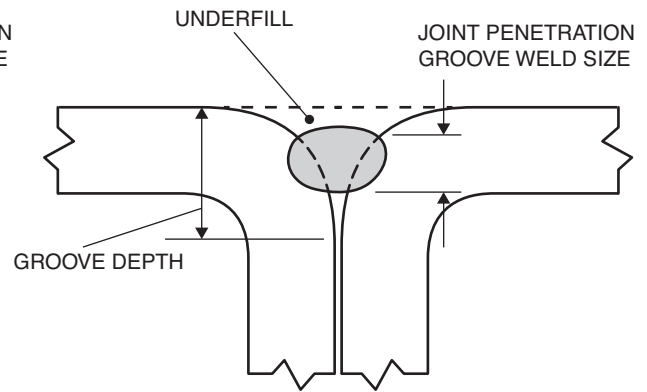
(Continued)—Groove Weld Size and Joint Penetration
